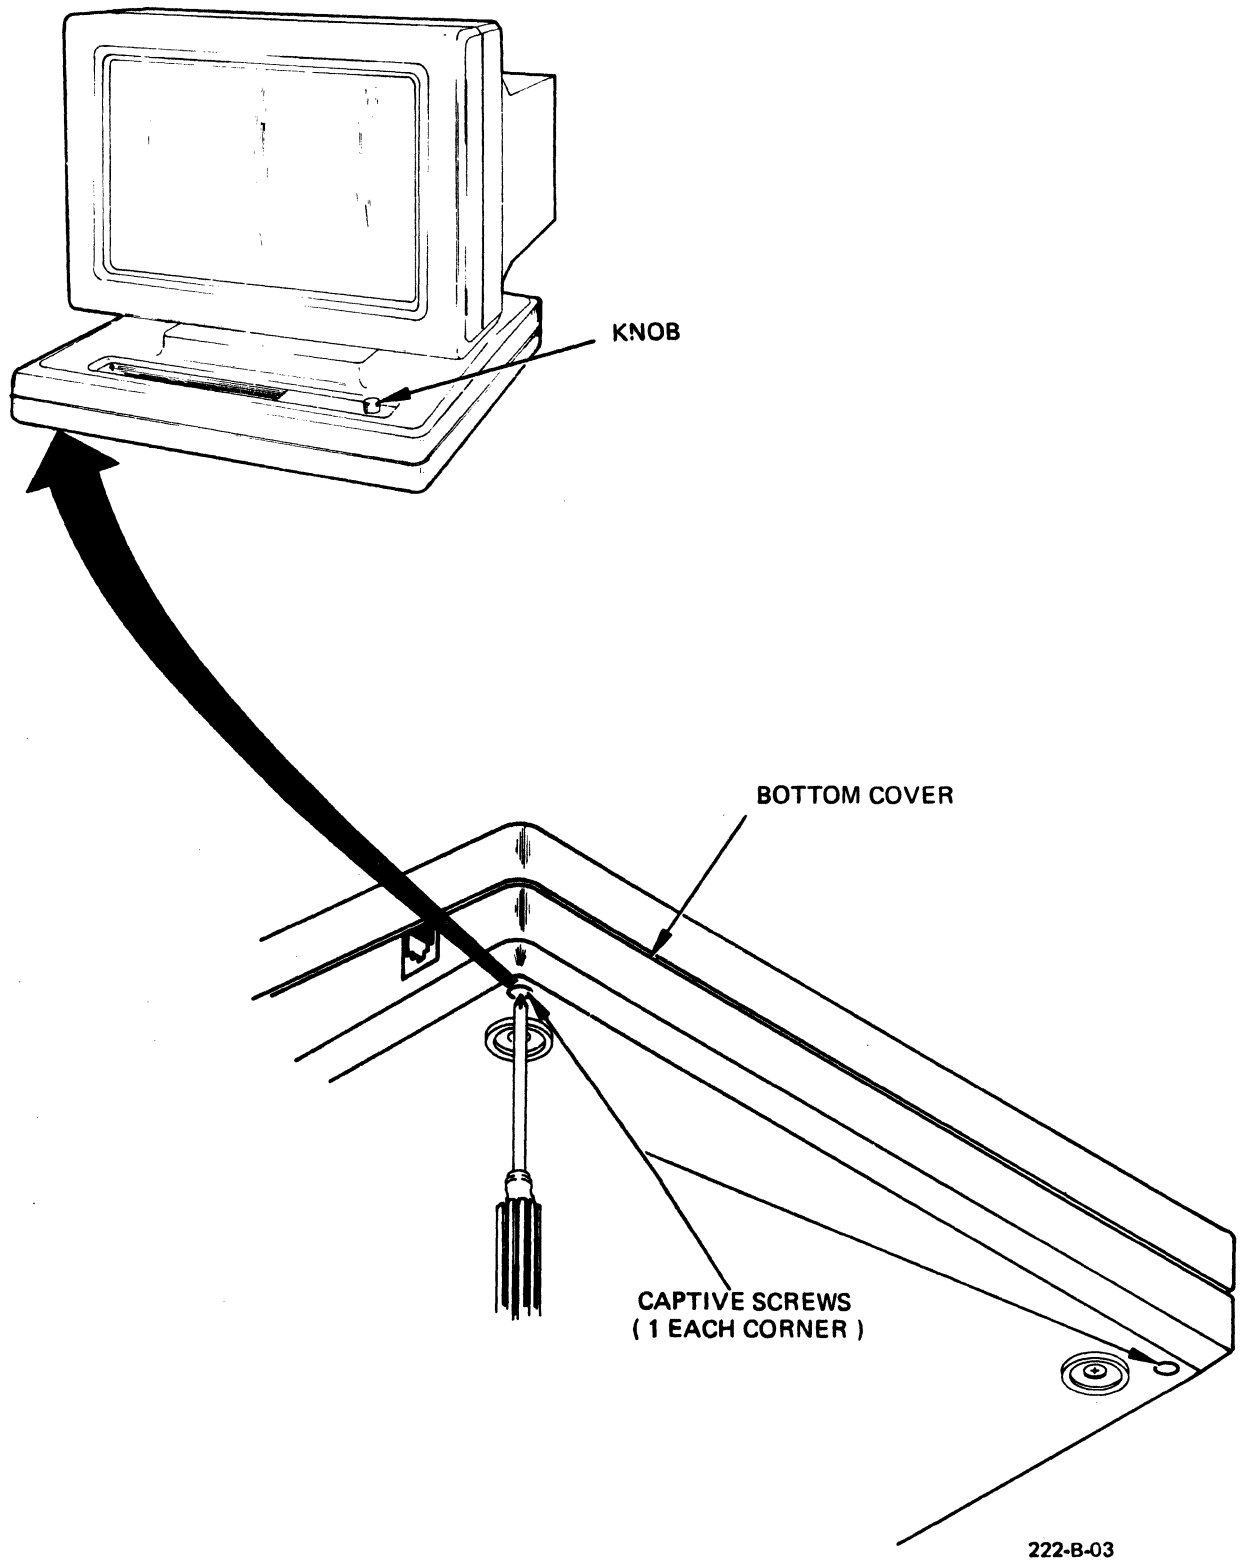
Monitor Bottom Cover Removal and Replacement
